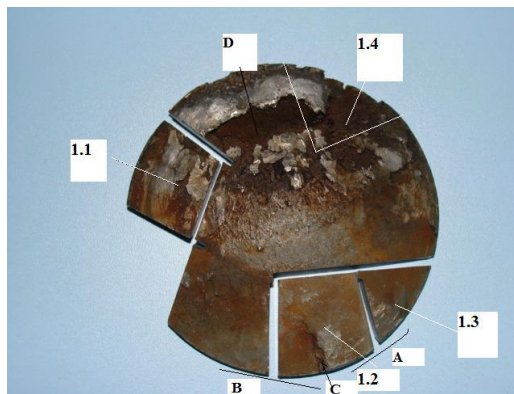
Aspect of fracture surface of axle shaft.
